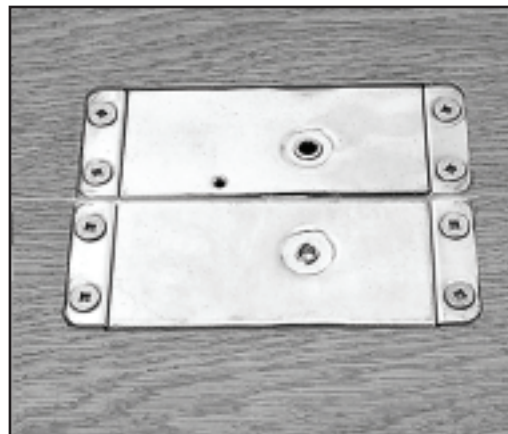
Type 2 Latches are readily mounted in sheet metal components. See [TDS 92-1](#)
